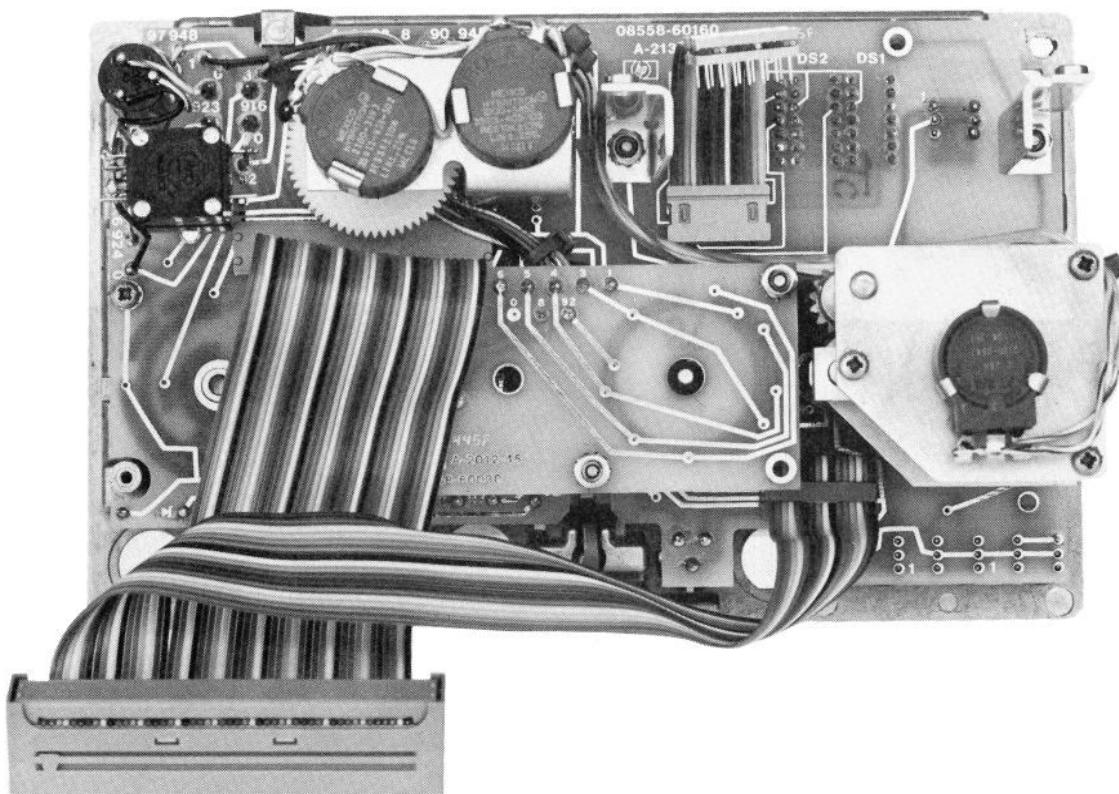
REAR VIEW OF FRONT SWITCH ASSEMBLY A2
